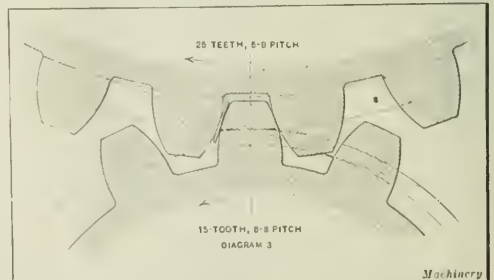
Gears which have been cut Deeper than Standard to give Backlash
